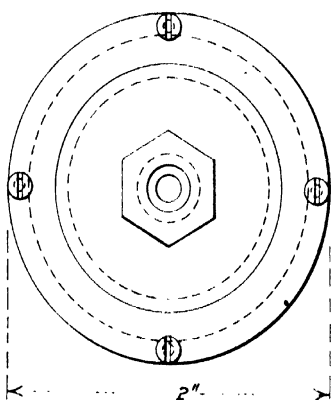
MACHINED BRASS HEAD FOR GELOMETER
